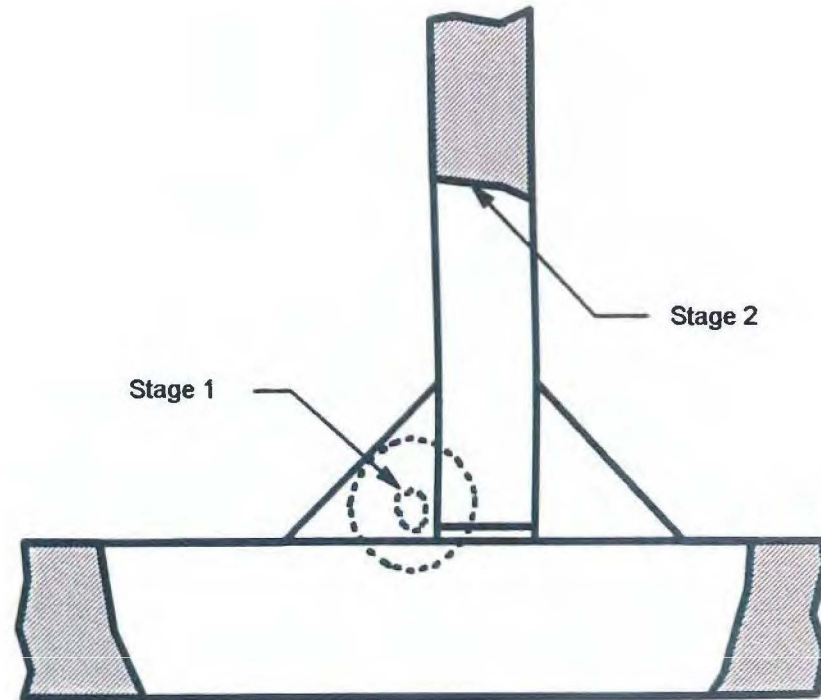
Stages of crack growth for welded I-beam.
